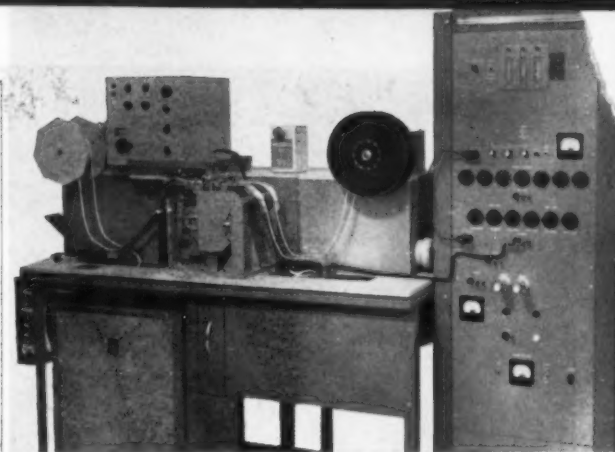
AUTOMATIC Component Tester Model TCS-1. Taped components travel from supply reel on left through test assembly to takeup reel.
